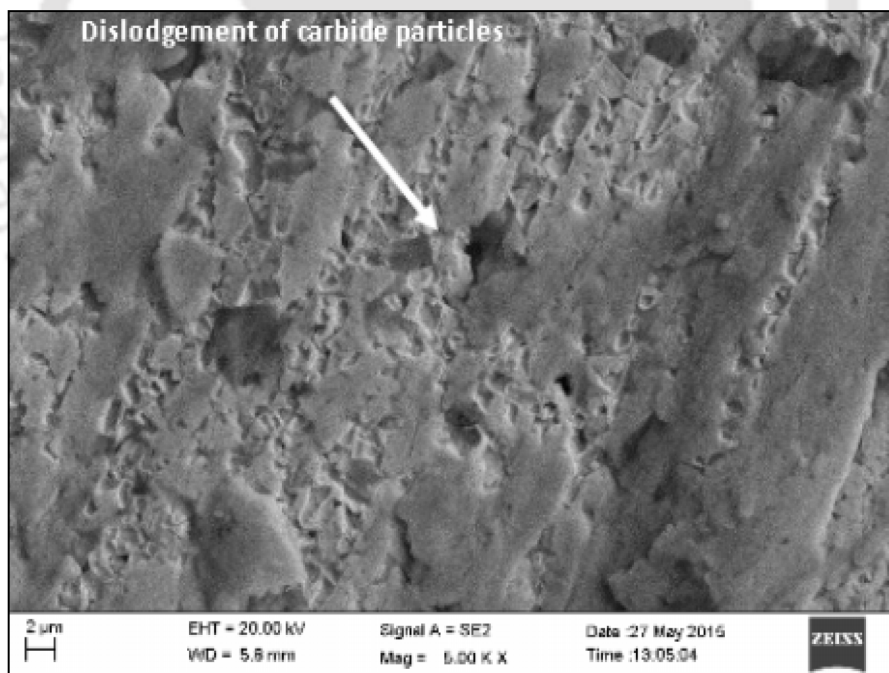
(b) Close up view of the rake surface of the cutting tool with CaF_2
